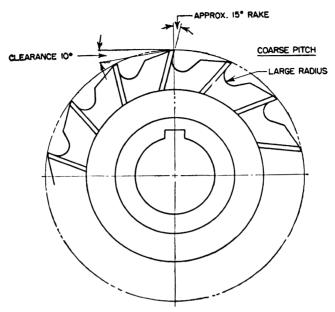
Design of typical cutter for milling zinc and aluminum die castings.
